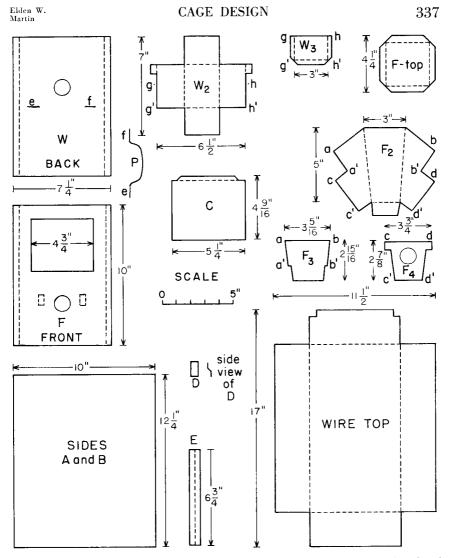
Scale drawing of composite parts of experimental cage. W—Back side of cage with watering hole over which waterer (W_2) fastens on clips D. Points e and f are soldered points of attachment for perch (P). W_3 is cage side of waterer. F—Front side of cage with feeding hole and door opening. Feeder (F_2) has a top front (F_3) which attaches at common letter points (a to a, b to b, etc.) and a bottom front (F_4) which provides extensions (c and d) to hold feeder to the cage by hooking on clips D. Sliding door (C) runs in channels formed by bending strip E double. A & B—identical side pieces for cage. Wire Top—piece cut from $\frac{1}{2}$ inch mesh hardware cloth; to be soldered to main cage frame formed by soldering W, F, A, and B. Dotted lines represent break-points for 90-degree bends except for piece E which requires a bend of about 170 degrees.
